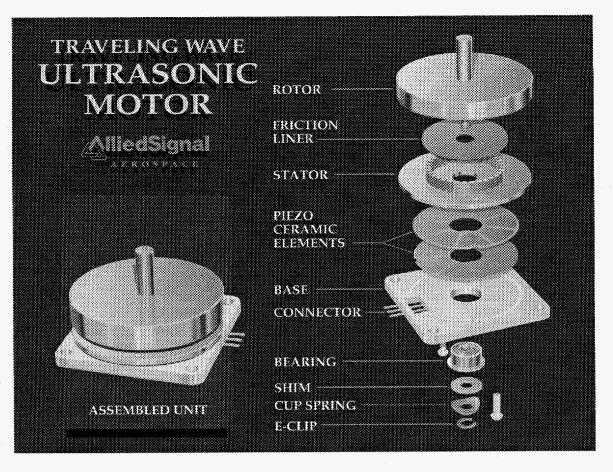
Assembled and exploded view of a traveling wave ultrasonic motor
